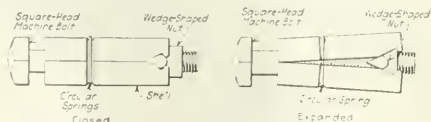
SINGLE-SPREAD TYPE OF EXPANSION BOLT
